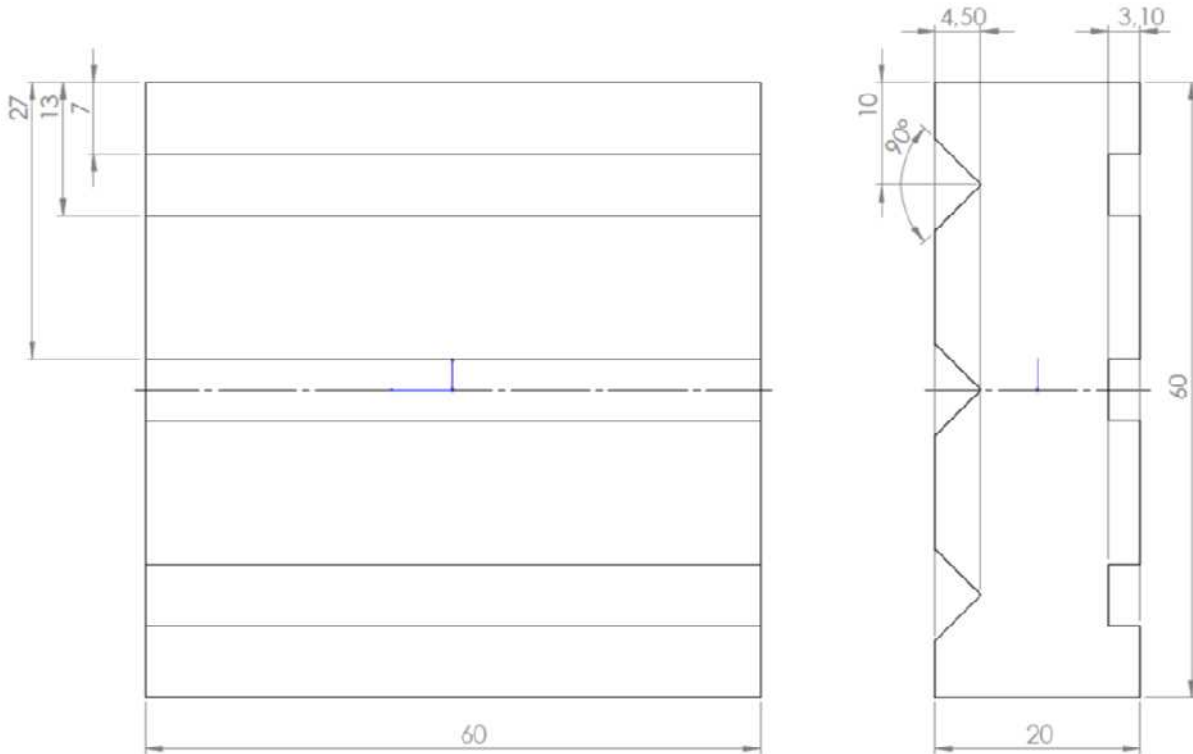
Milled block for grinding the samples in dog bone shape; Measurements in mm
